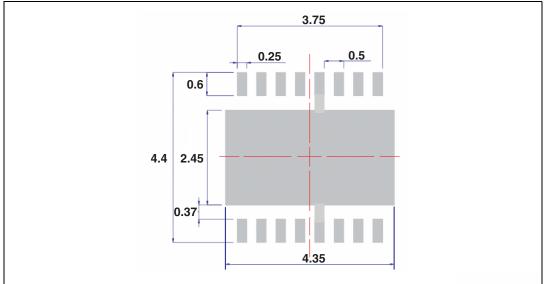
QFN 5 x 4 16-lead footprint (dimensions in mm)
